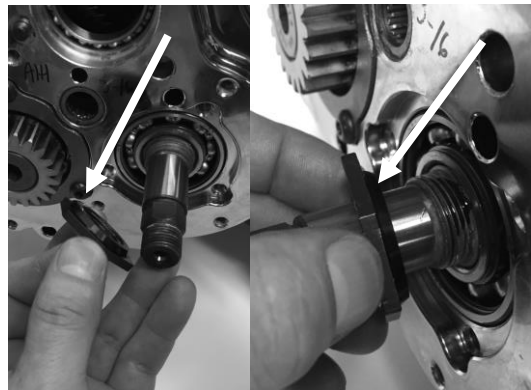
| INSTALL THE SNUOT OF THE COUNTERSHAFT BASE NUT FACING THE BEARING
